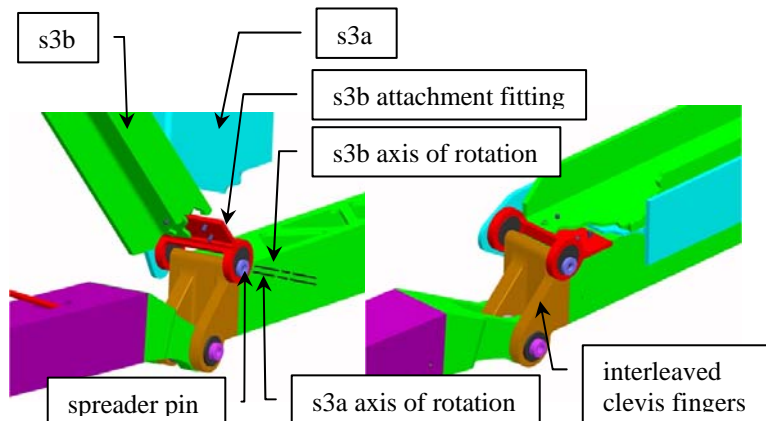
Elbow Joint Detail and Spreader Nesting for Packaging
